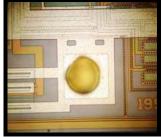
Extracted Silicon Die Re-Assembled Into MCM Hermetic Package
